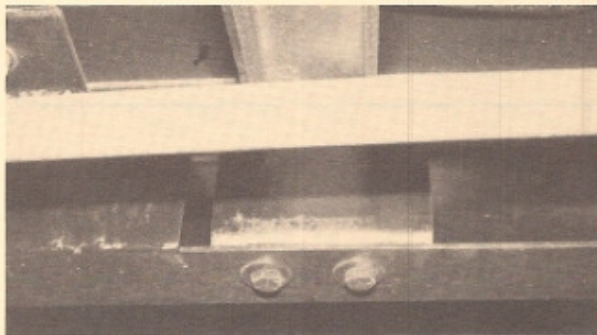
No. 3 CROSSMEMBER — No. 3 crossmember is held securely with four (4) 1/2" diameter bolts located at each side on the frame rail. Two bolts are located at the plate facing outward toward center of the vehicle and two bolts are located underside of the frame rail. Remove these bolts and slide the crossmember toward the rear of the vehicle. For reinstallation, torque these bolts to 75-80 ft. lbs.
